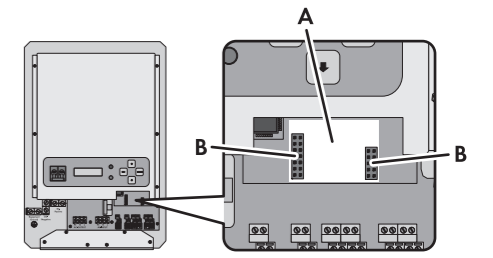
Installation position and connection of the SI-485PB-NR in SI 3324 / 4248
